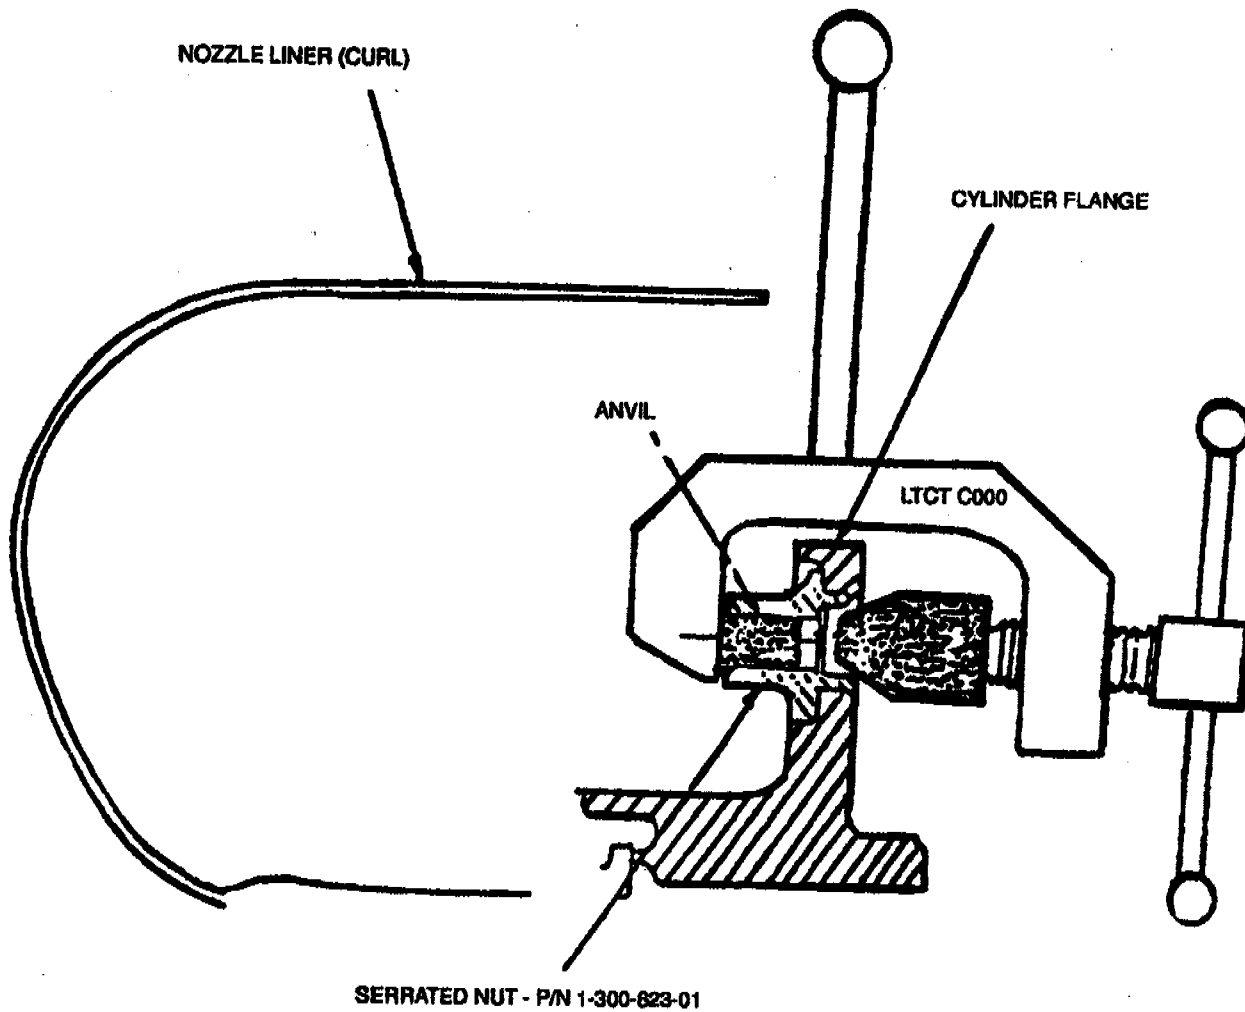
Installation of Rosan Type Serrated Nuts on Nozzles (P/N 1-110-520-19).
